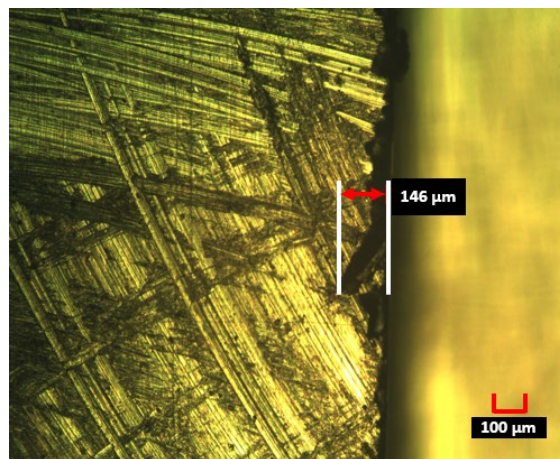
Minimum burr width noted on up-milling side of the workpiece.
